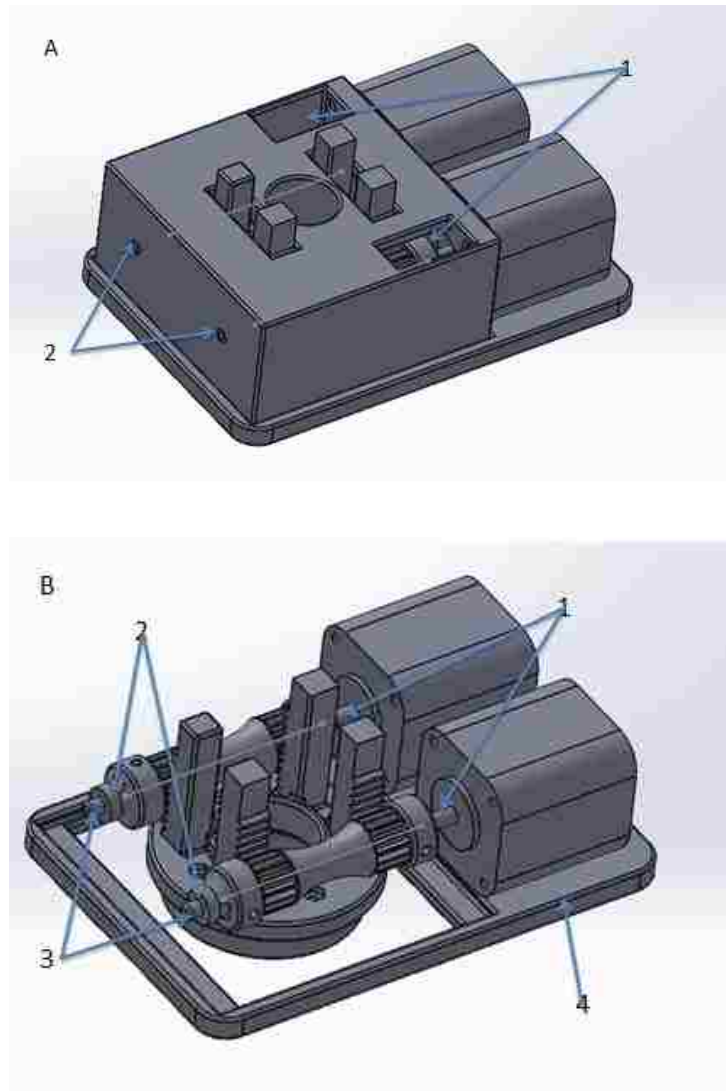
CAD for the two motors design in two different view: A-1.Two rectangular holes; A-2.Two pin holes; B-1.Motor rod; B-2.Bearings; B-3.Pins; B-4.Bottom plate
